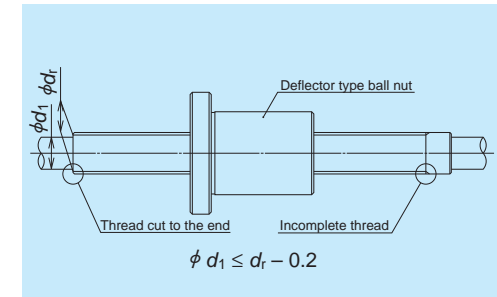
Shaft end of a deflector recirculation system ball screw
